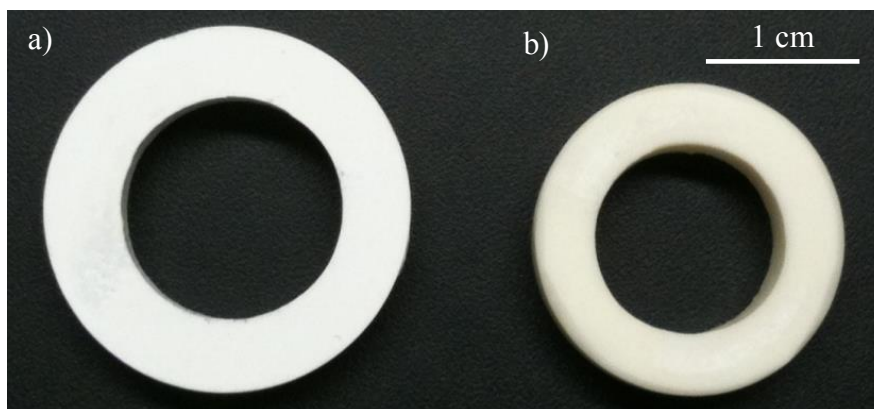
An alumina ring was formed using the pneumatic vibrator during injection molding and did not develop closed pores due to air bubble formation. Specimen a) prior to and b) after binder burnout and sintering.
